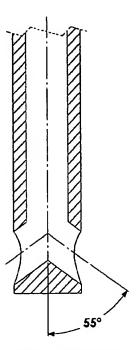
Section View of a Casting Nozzle with Design Turning Angle of 55 Degrees
